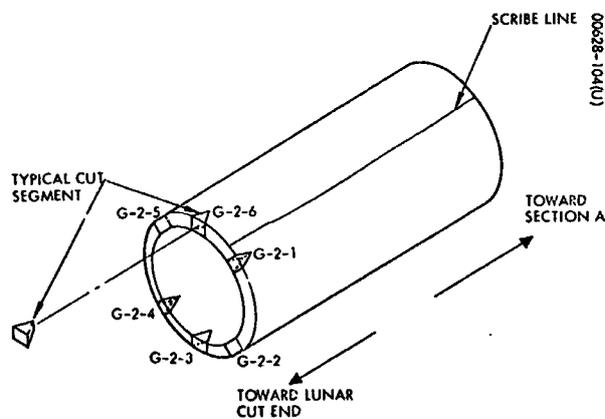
Section G-2 of Polished Aluminum Tube Shown in Figure A-5, Showing Further Segments Removed at Hughes
